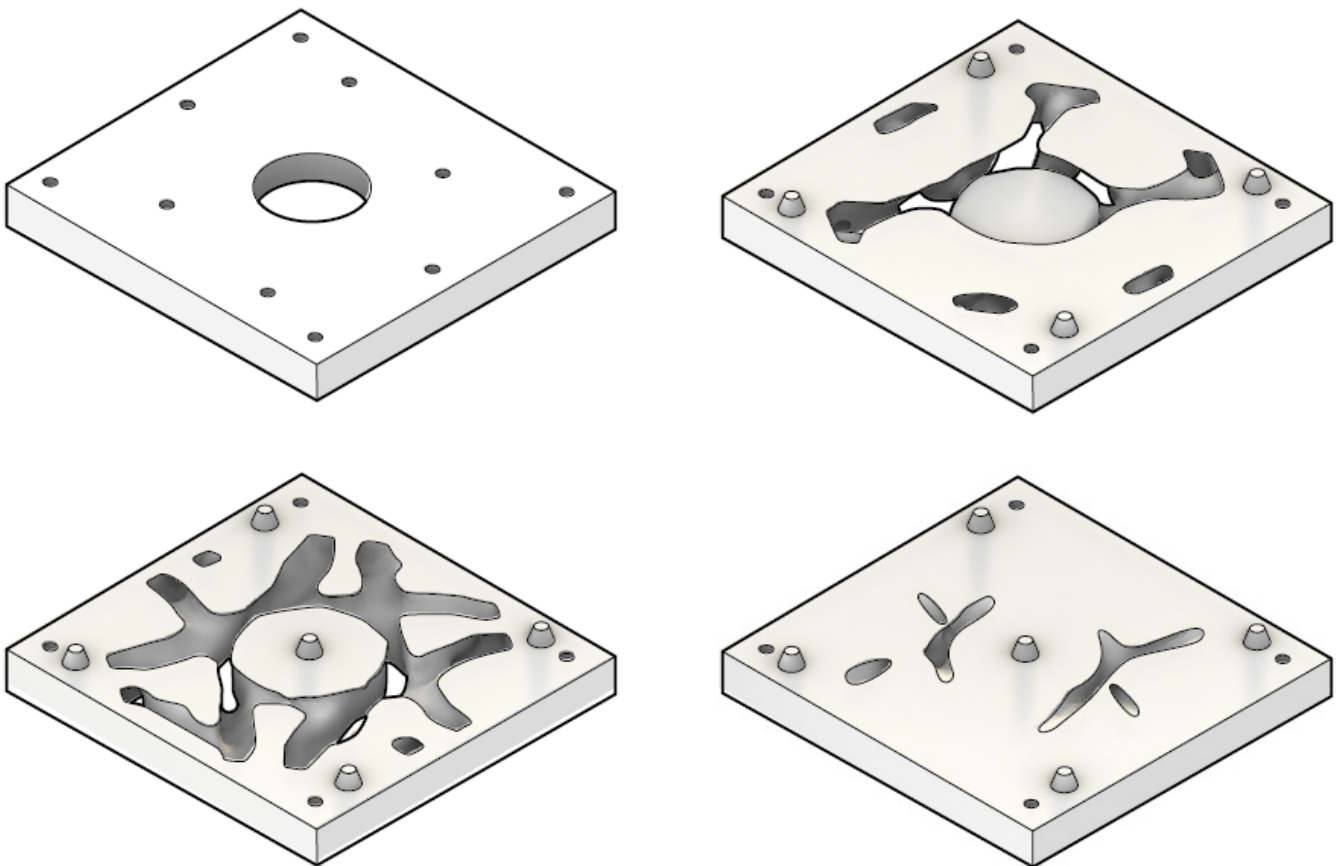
The design of the sand mould in four parts. Interlocking pin and hole elements have been added to align the layers of the mould
